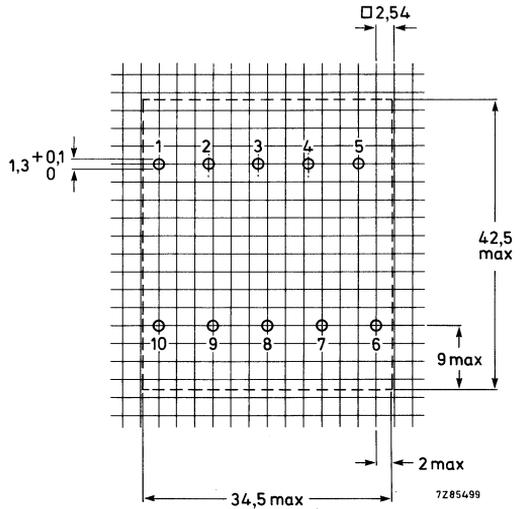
Hole pattern for mounting on a printed-wiring board, viewed from the solder side.
